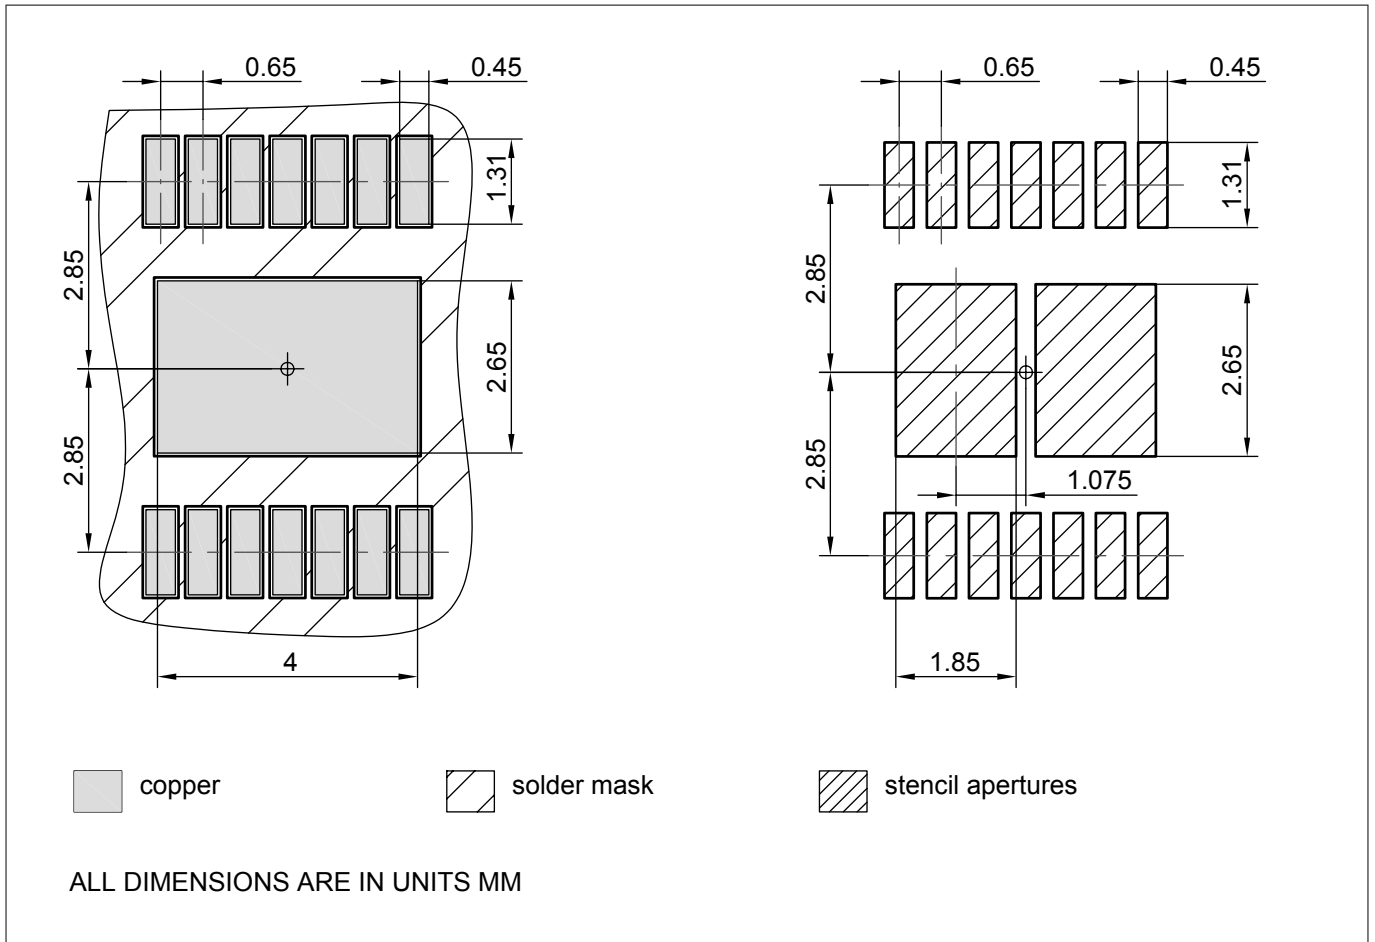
PG-TSDSO-14 (thin (slim) dual small outline 14 pins) package pads and stencil
